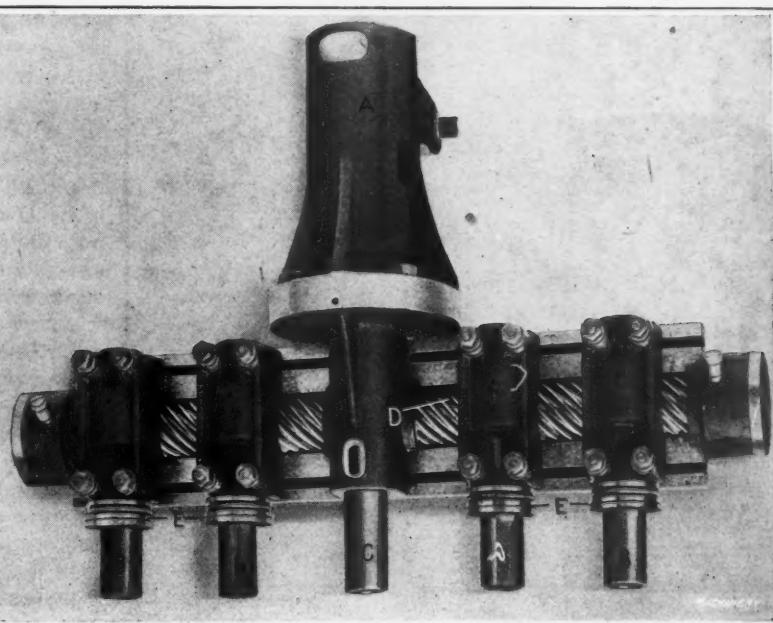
Adjustable Straight-line Drill Head; Spiral-gear Drive
